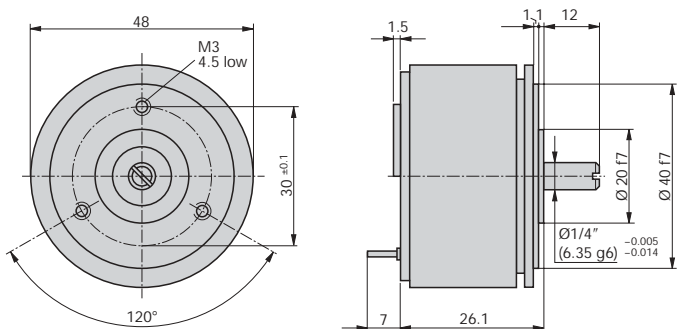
KINAX 2W2 with special drive shaft at front only, \varnothing 1/4", length 12 mm.
